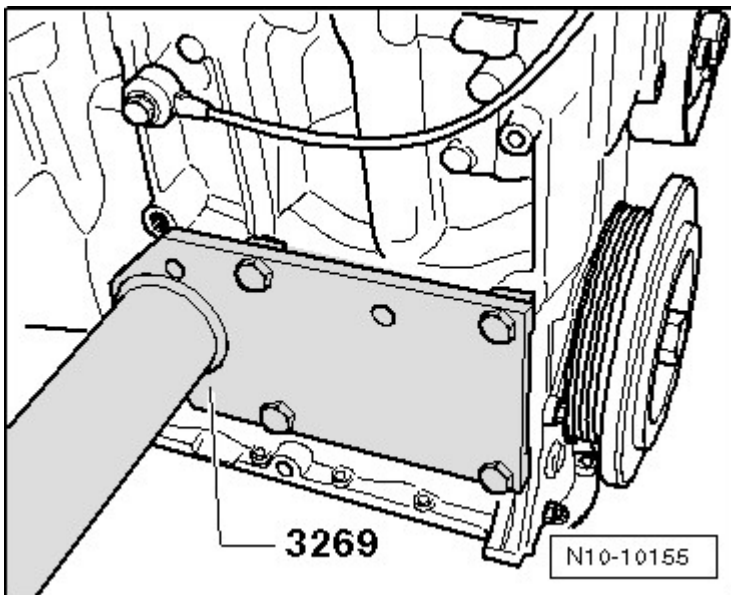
Identifying Engine Support 3269 Tightly Bolted To Cylinder Block
